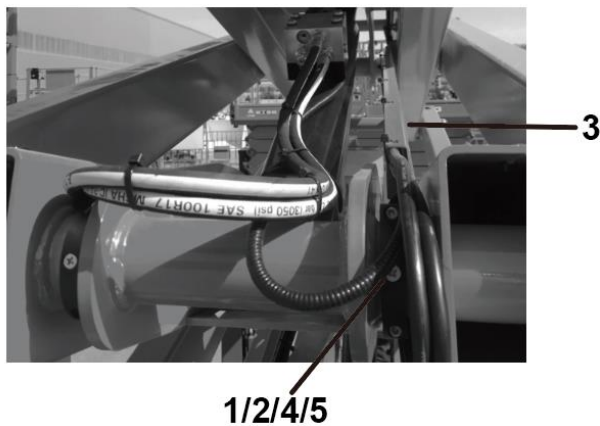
Fourth fork wiring board assembly (SR4069E)
